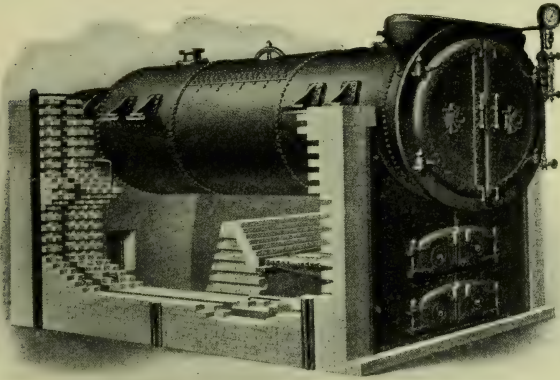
Bigelow Horizontal Return-Tubular Boiler
